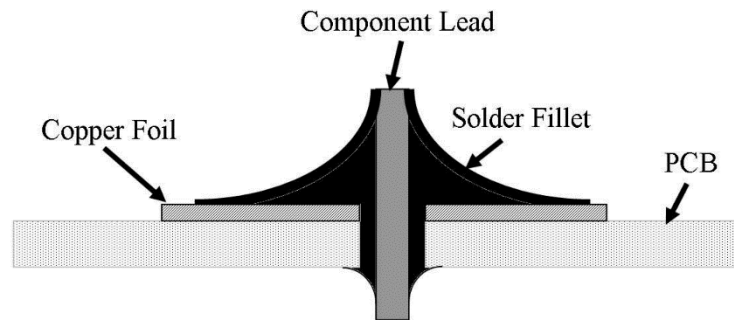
Example of Pin/hole soldering with the ring concept.
